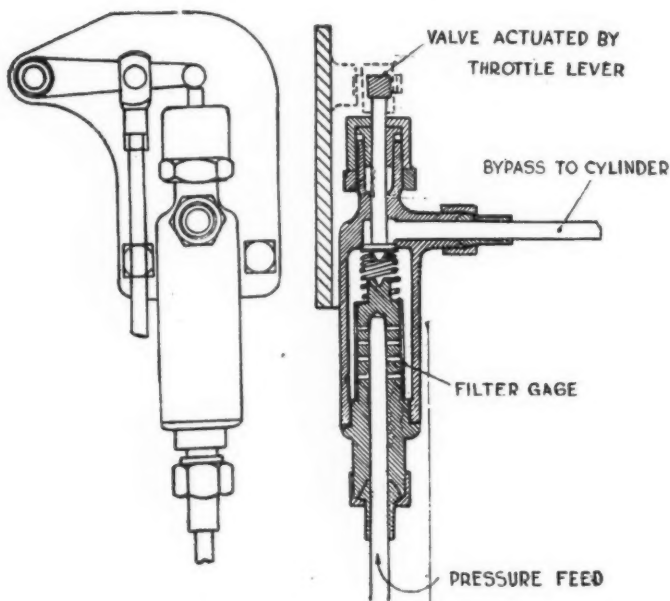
Rolls-Royce throttle-controlled oil feed to cylinders
